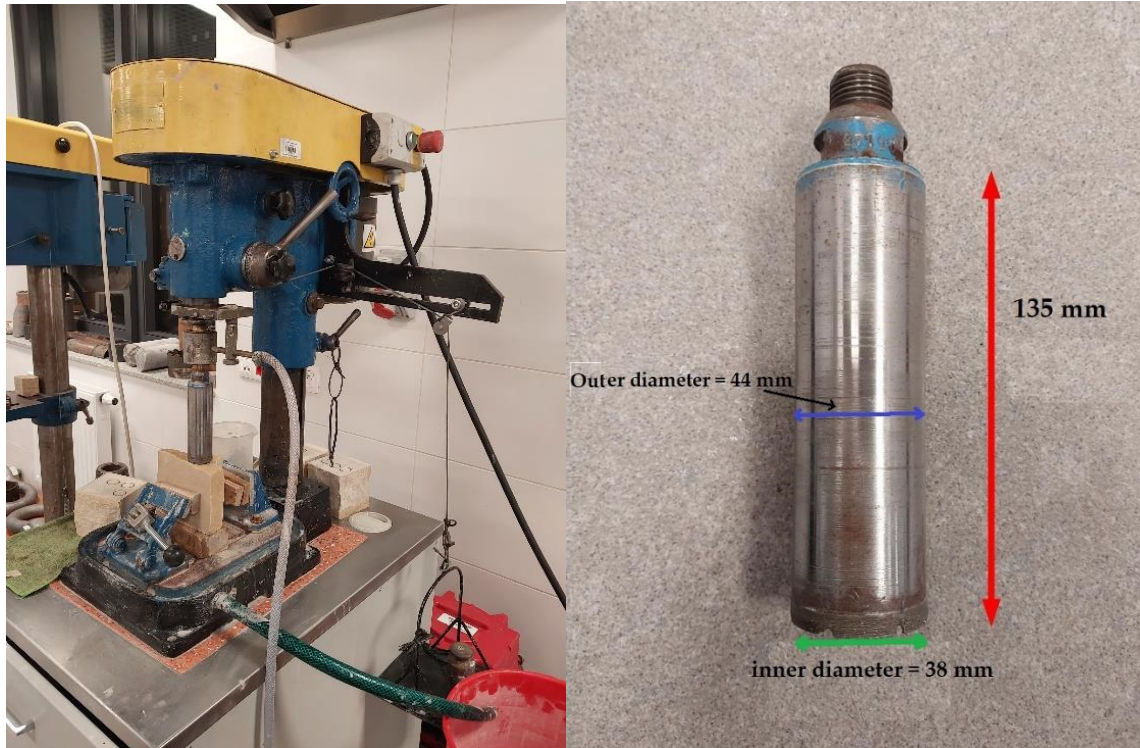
a) Drilling machine; b) coring diamond drill bit.
